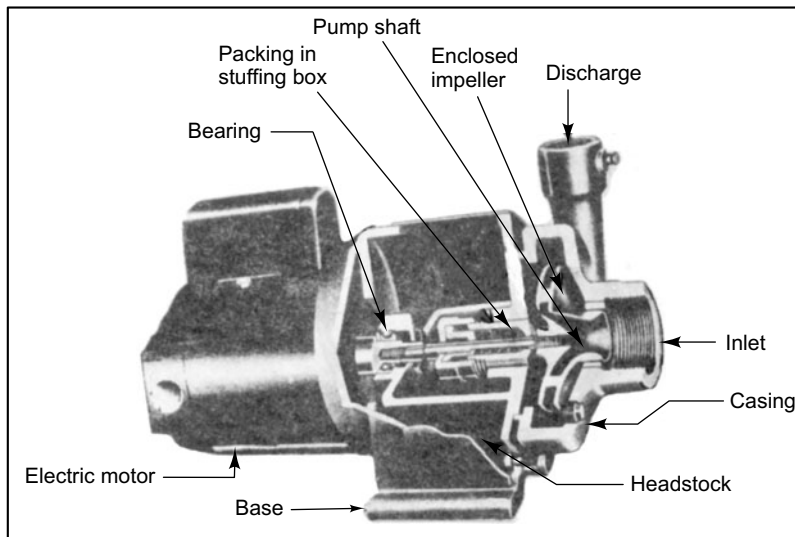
Cut-away section of a horizontal centrifugal pump coupled to electric motor as a single unit
